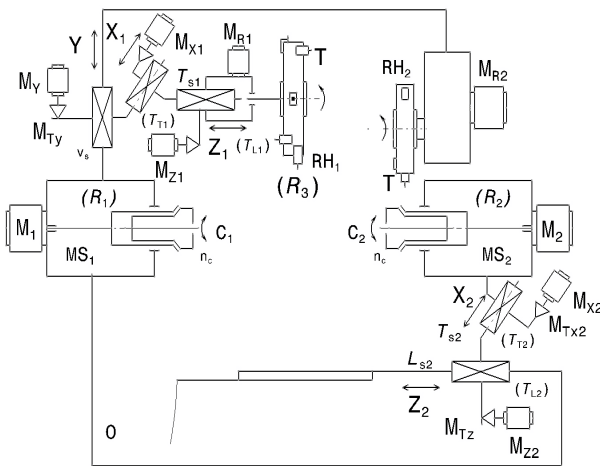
Turret lathe with two coaxial symmetrical main spindles
